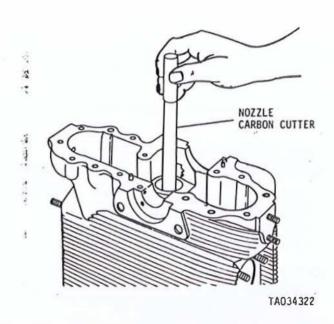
Cleaning carbon deposits from fuel injector nozzle seat.
